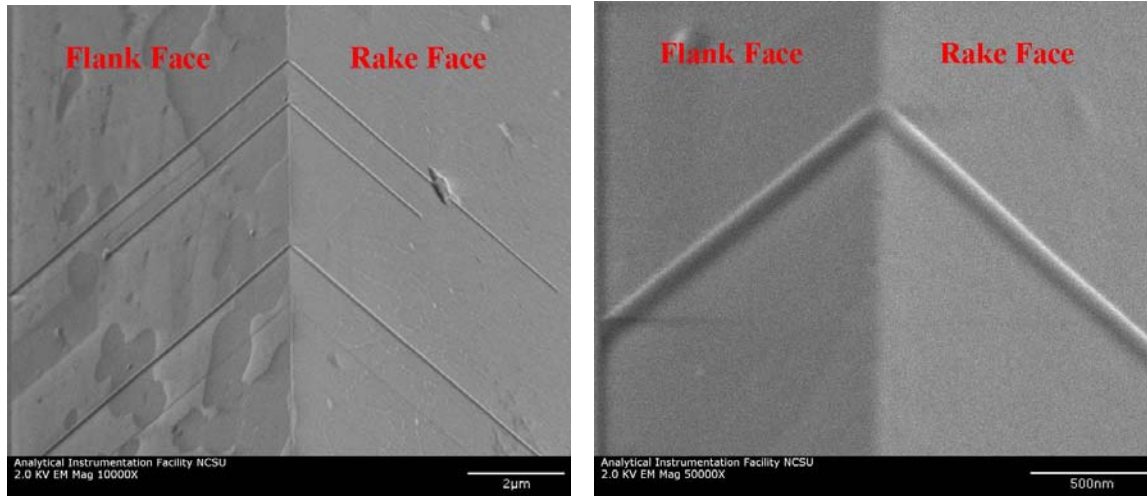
Cutting edge of new diamond tool with round nose. In each image the flank face is on the left and the rake face is on the right.
